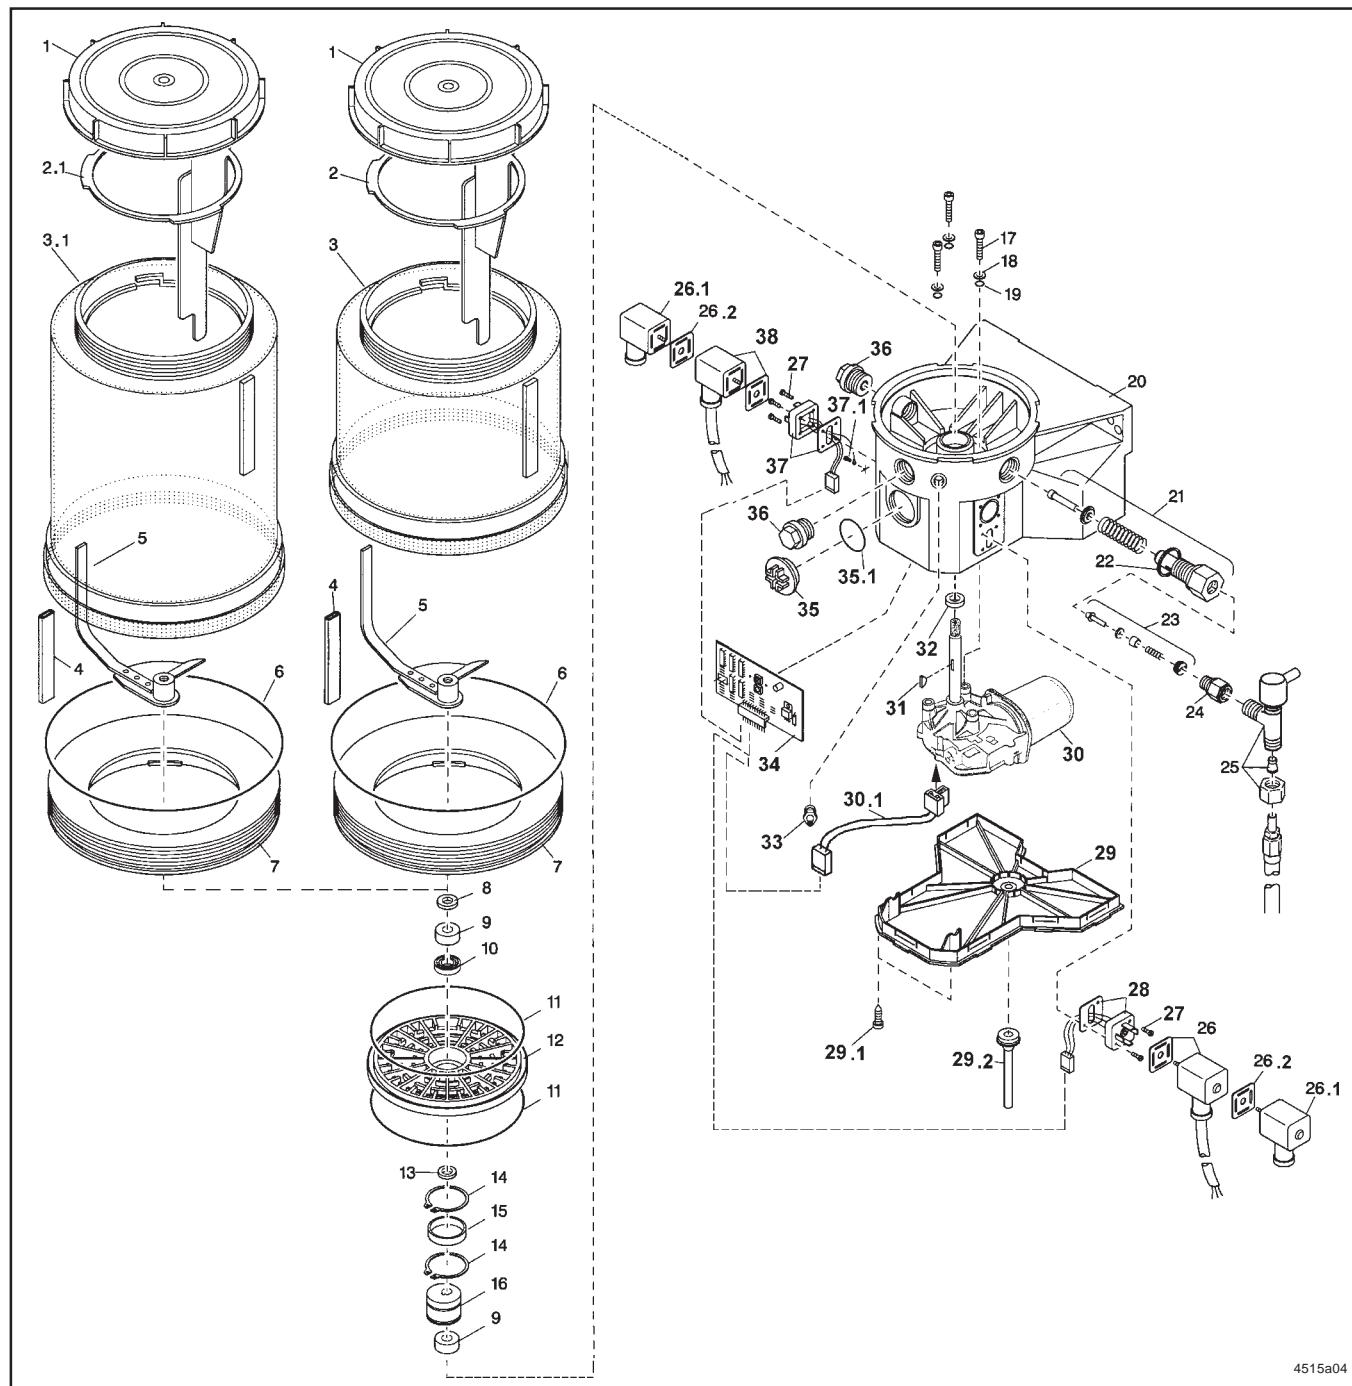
Explosion view for P 203 -4XNBO/8XNBO/4YNBO/8YNBO-K-12/24-1/2A1.01/10
